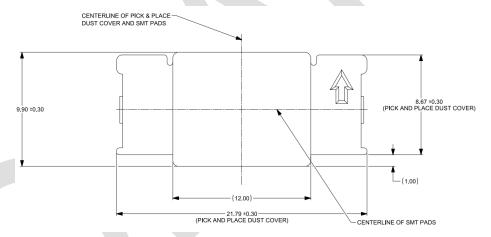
Top View of Fixed-Side Connector with Dust Cover
